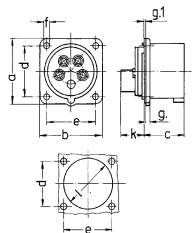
MB 68 Dim. in mm	Amp. Poles	16			32
